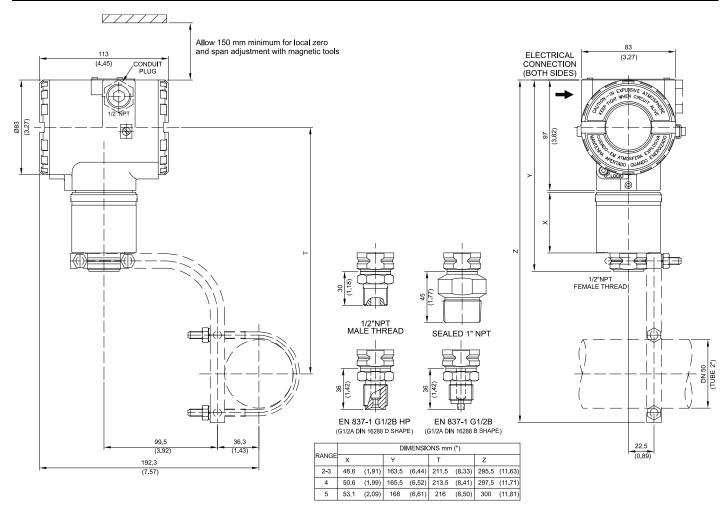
(a) - Dimensional Drawing and Mounting Position for LD292
